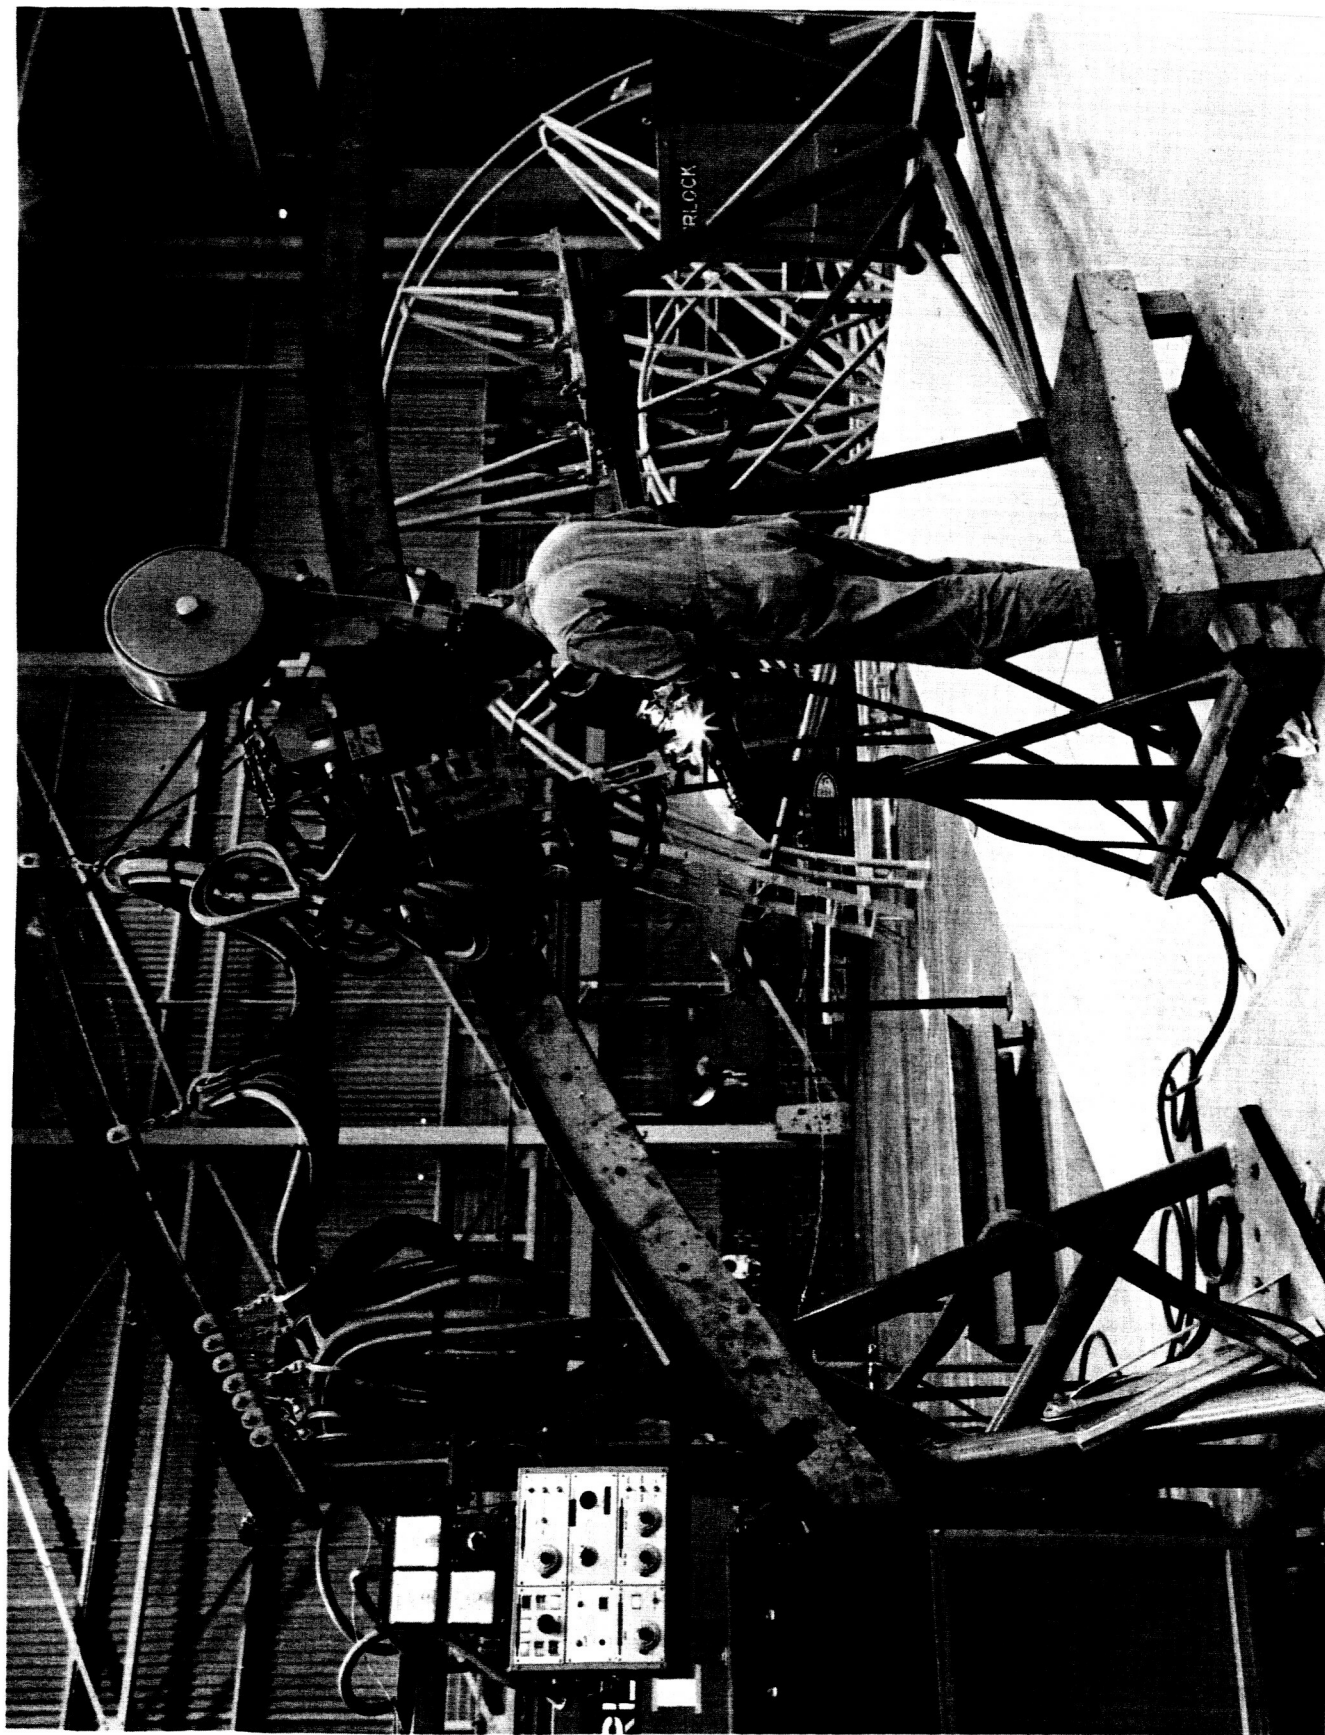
Use of Sciaky Welder on Base and Top Sections
